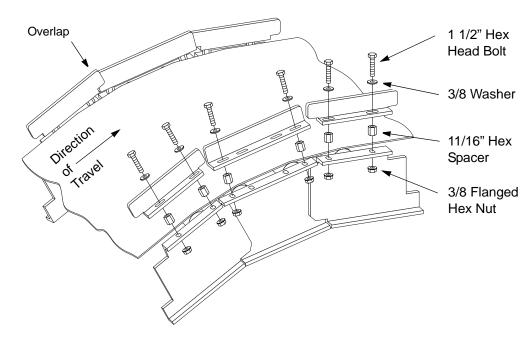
Upper Bend Unit with 1 3/4" Angle Side Guides, Spaced Mounting
